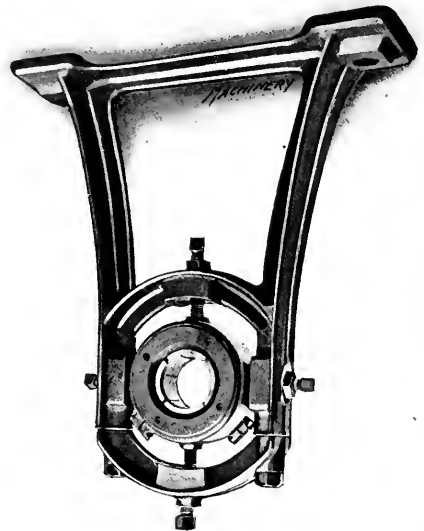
Suspension Ball Bearing mounted in Lineshaft Hanger
